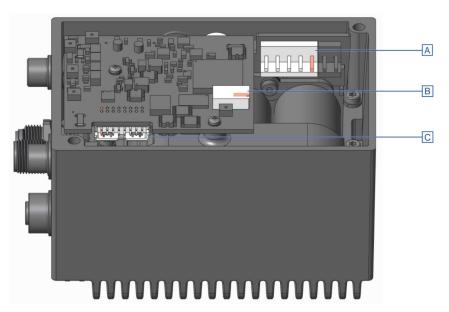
Connector arrangement: motor [X6], holding brake [X6B] and angle encoder [X2]
